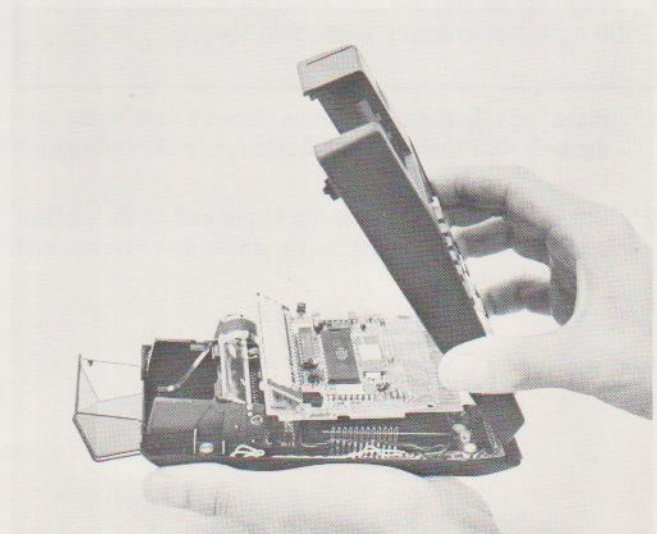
Positioning Keyboard/Topcase Assembly Over Bottom Case
